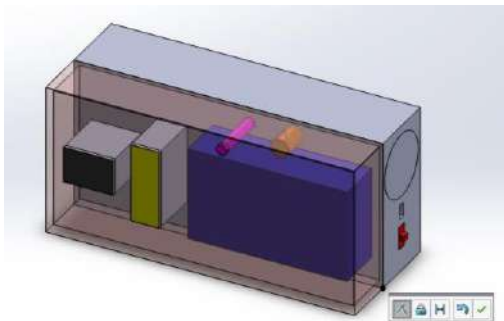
System Design in 3 Dimensions using SOLIDWORKS. Source: Author
